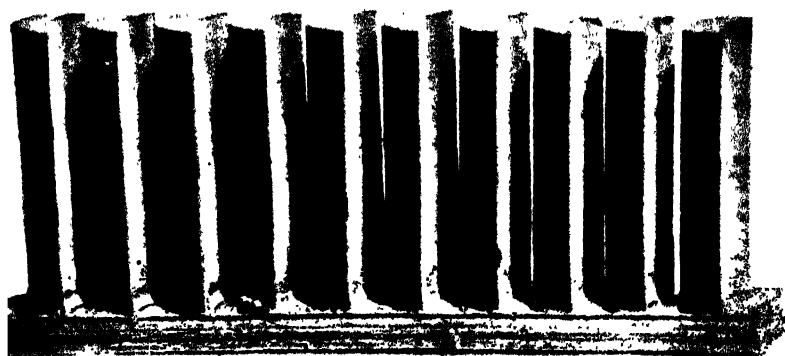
Group of small stainless iron turbine blades oxy-acetylene welded to a mild steel ring. Slightly enlarged.
